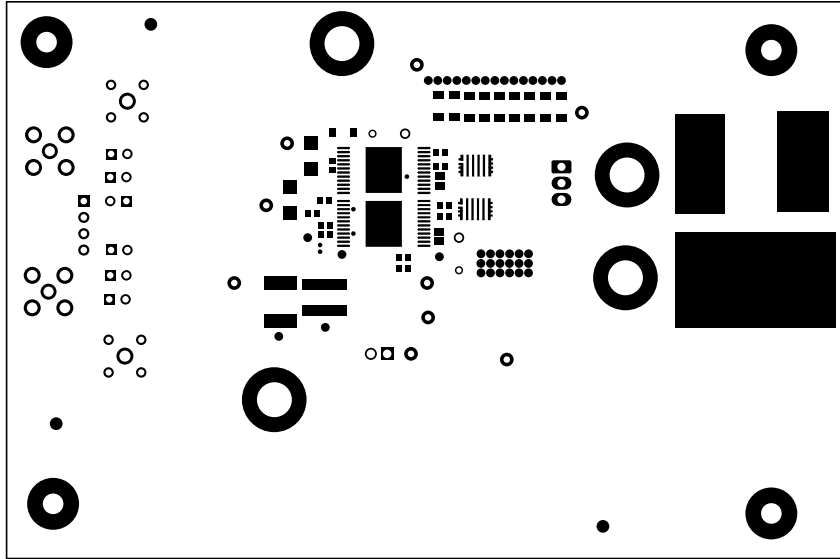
Top Solder Mask (TPS7H6003EVM-CVAL)
